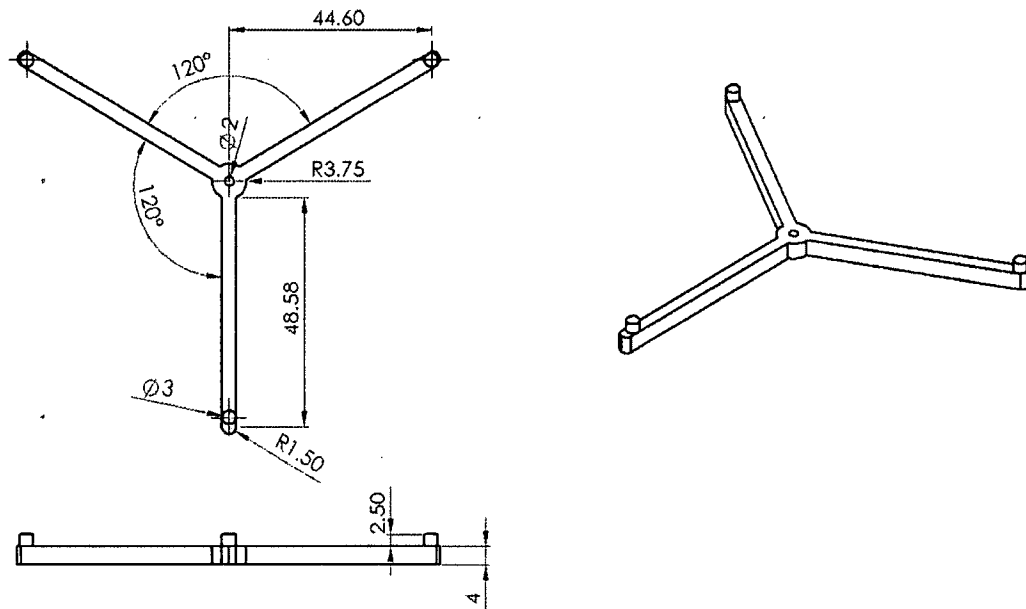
The top of the spin table designed to securely hold the silicon wafer centered over the motor during spin coating. The design is optimized for minimal vibration and rapid printing times. All dimensions in mm.
